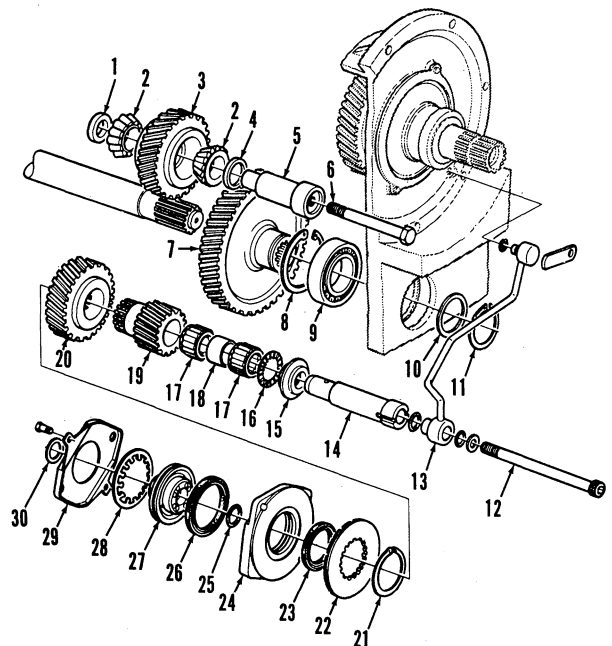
Exploded view of front section pto idler gears and drive gear used on 4050, 4250 and 4450 Quad-Range models equipped with MFWD.
